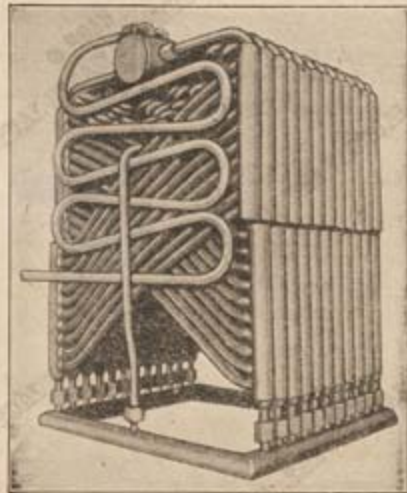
Showing the remarkable construction and sectional features of the American Steamer boiler.
